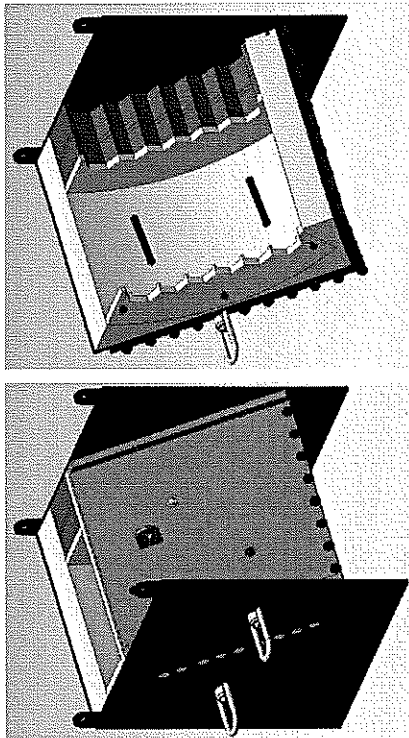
RENDER OF THE PSR MOLD IN THE "LOWER PLENUM LOWER REAR" CONFIGURATION: FULL ASSEMBLY (LEFT) AND FRAME WALL, MOLD CAP, AND INSIDE PLATE REMOVED FOR CLARITY (RIGHT).
